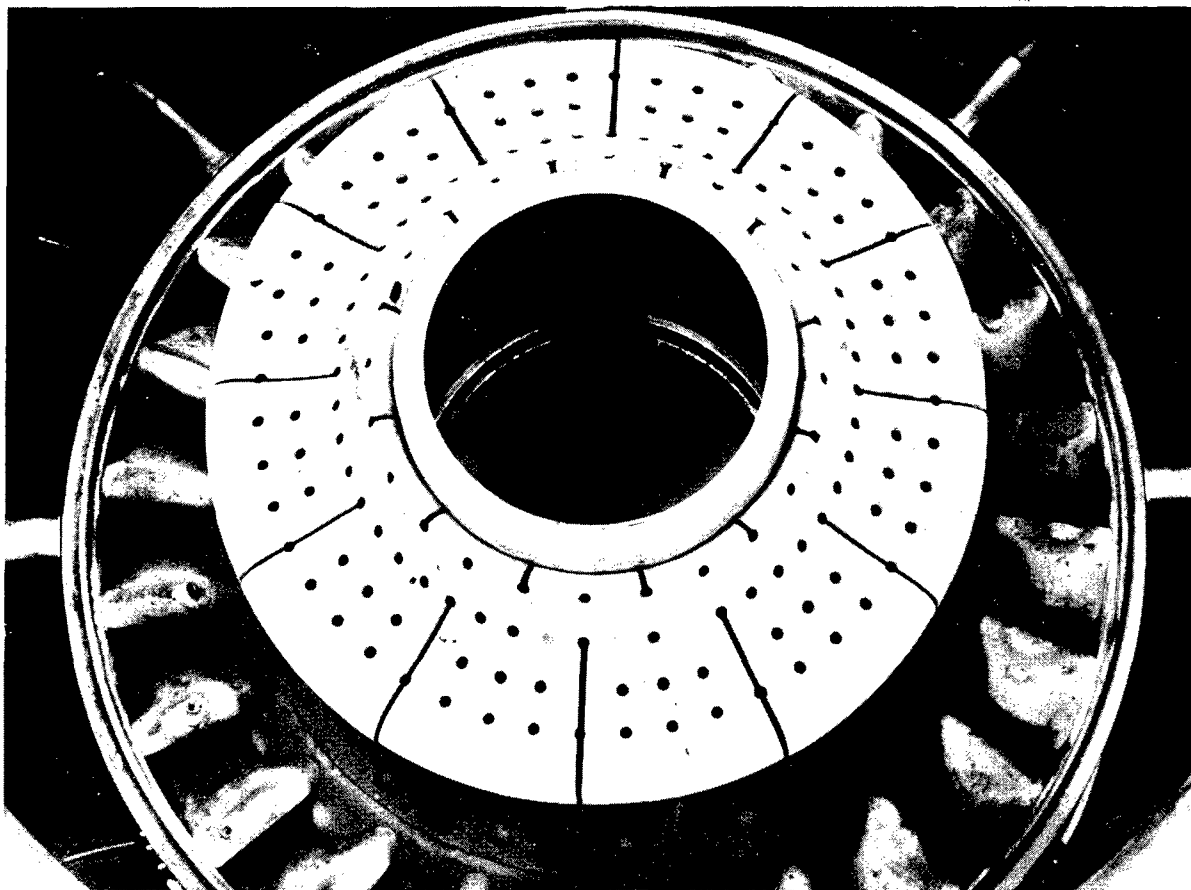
Inner Combustor and Nozzle Assembly After Build 6 Testing - Turbine Rig.
